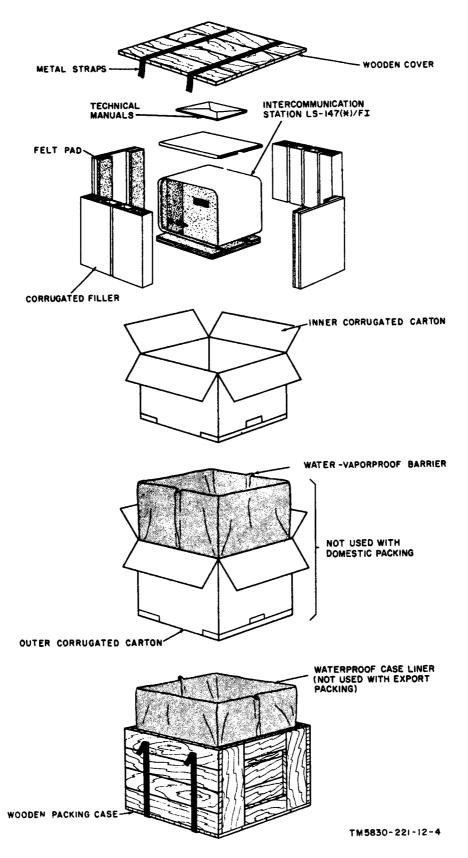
LS-147(*)FI, typical packaging and packing diagram.
